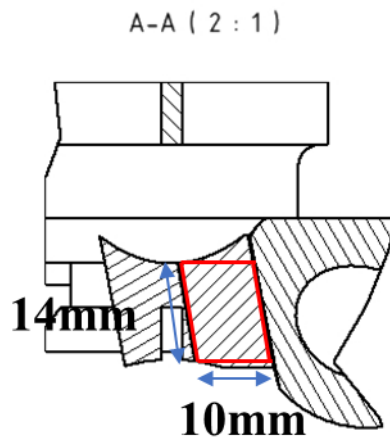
Section where maximum bending moment occurs for the welded runner.
